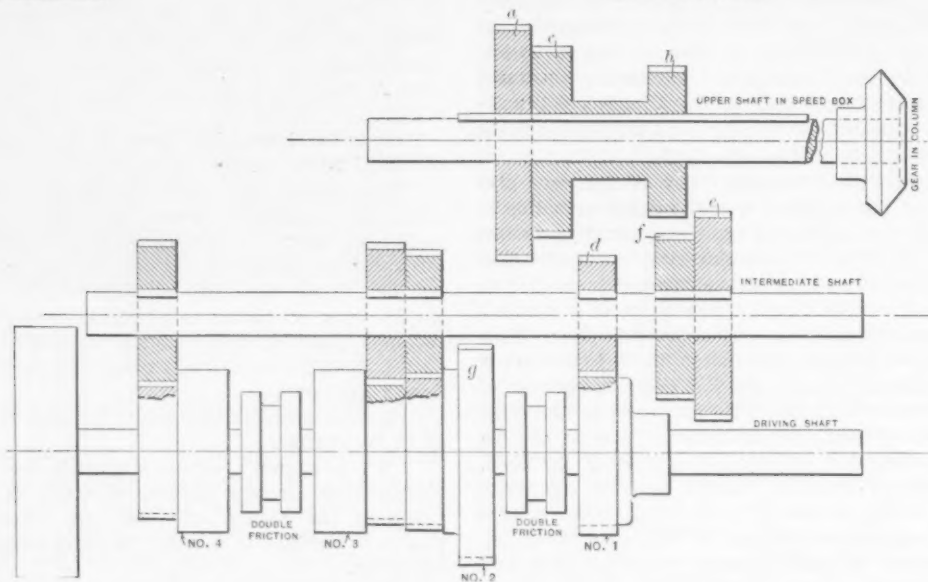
Diagram of the Speed Box Gearing in the New Mueller Radial Drill.
